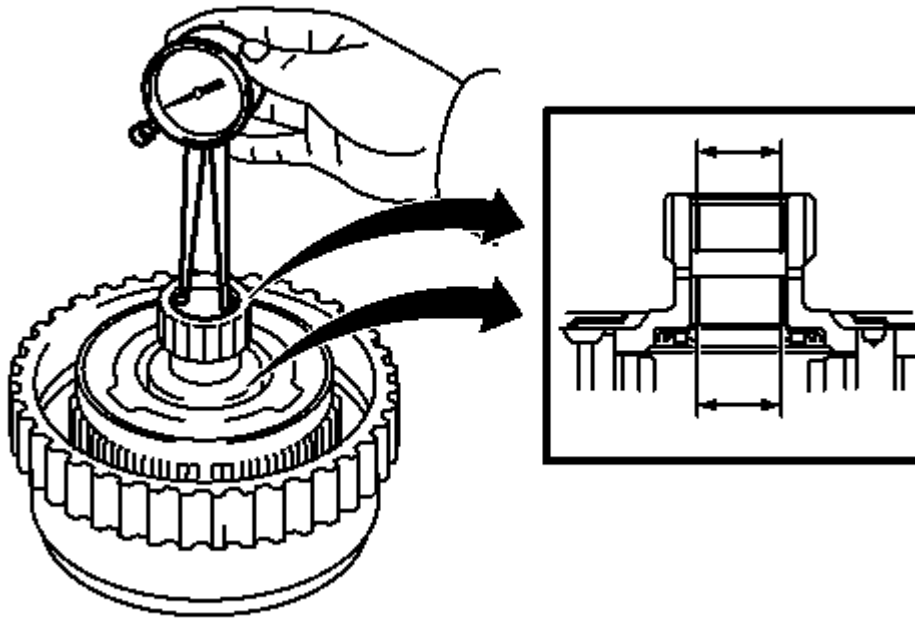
Measuring Inside Diameter Of Planetary Gear Bushing Using A Dial Indicator
